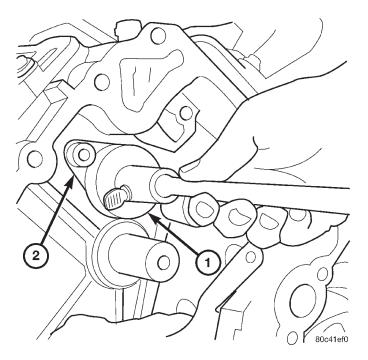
COUNTERBALANCE SHAFT REMOVAL/ INSTALLATION TOOL
